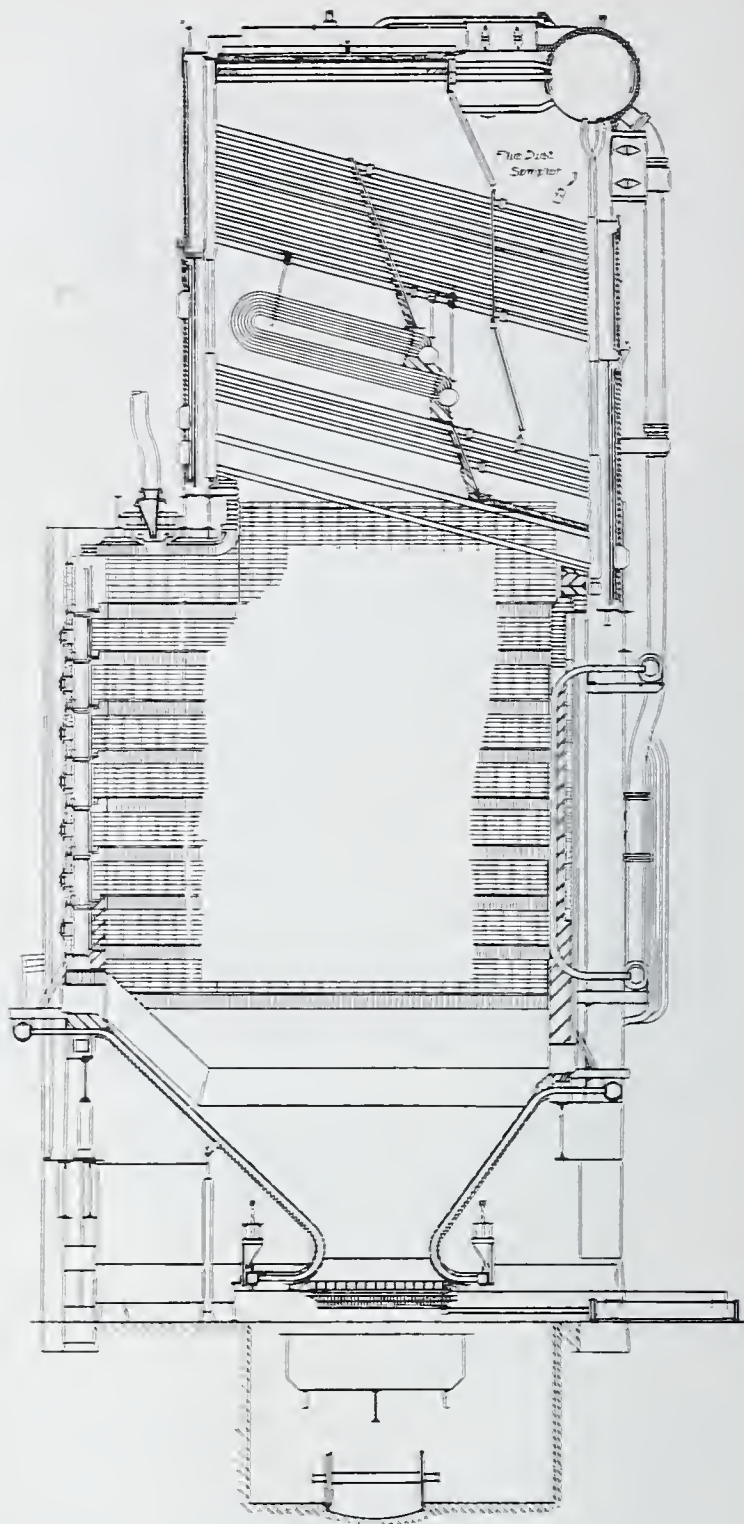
FURNACE M. SMOOTH SURFACE WATER COOLED HOPPER. AIR COOLED REFRACTORY FURNACE WALLS
